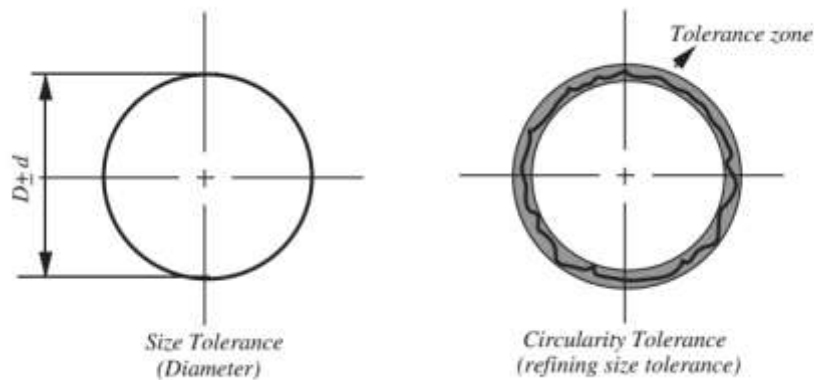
Size (dimension) and circularity (geometrical) tolerances. (Srinivasan, 1994)
